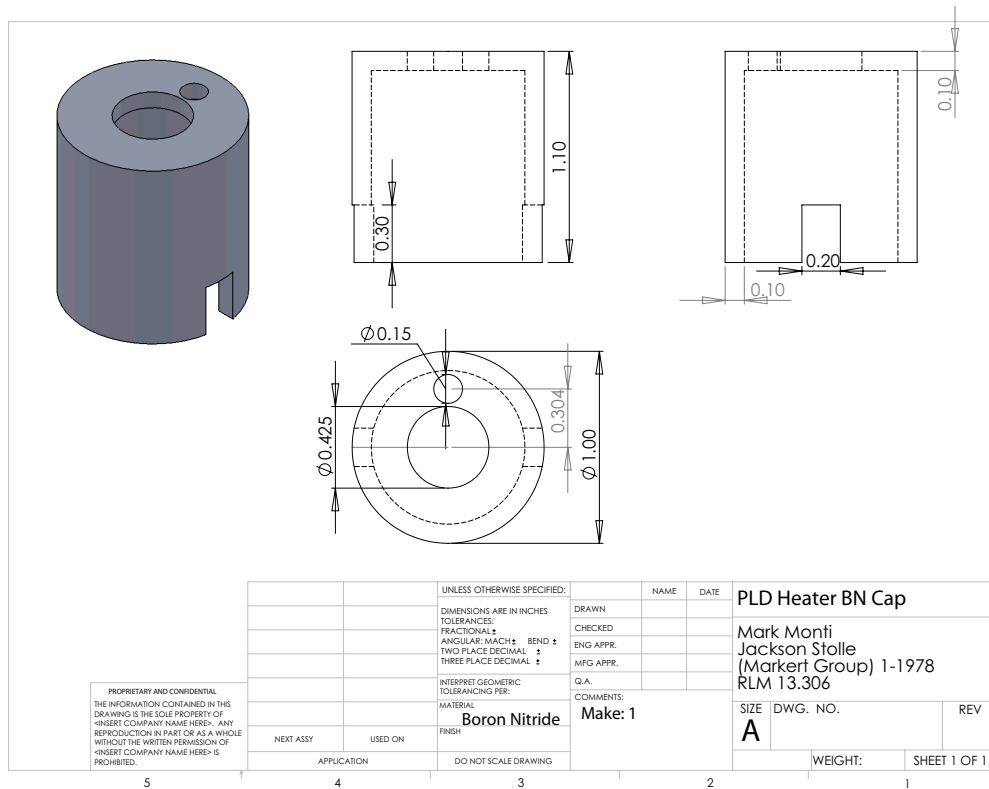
SolidWorks drawing of the boron nitride heater cap.
